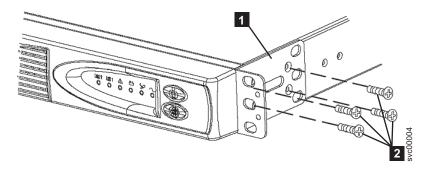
Attaching the mounting bracket to the uninterruptible power supply 5115
